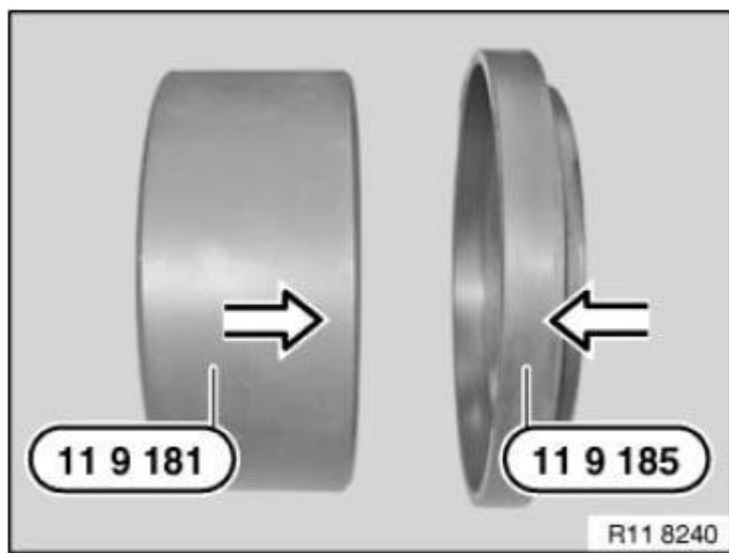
Connecting Special Tool 11 9 185 Onto Special Tool 11 8 181
